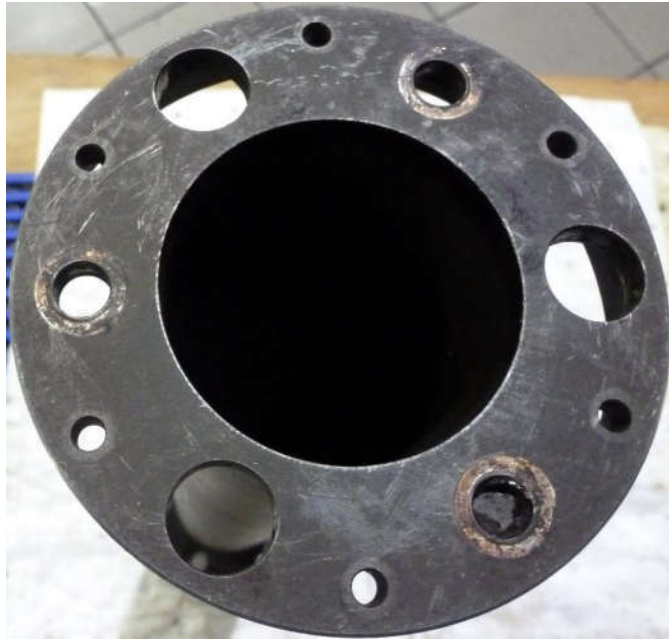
Spacer from LP compressor side, with damage at the bolt holes
